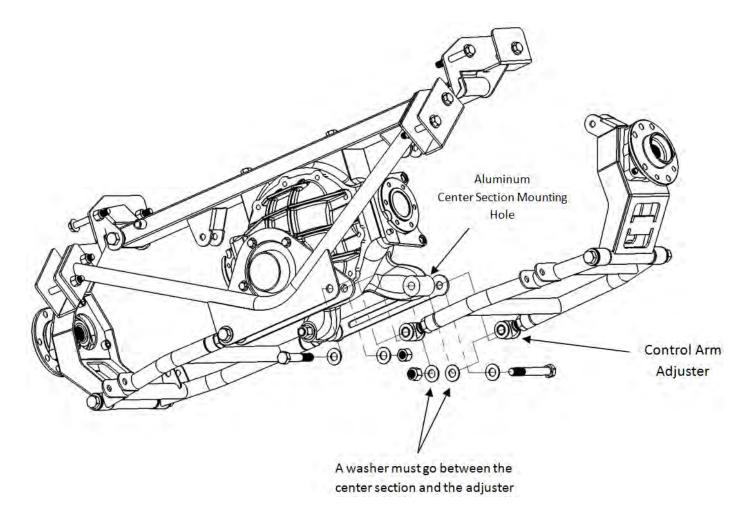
Exploded view of the driver side lower control arm assembly being installed.
